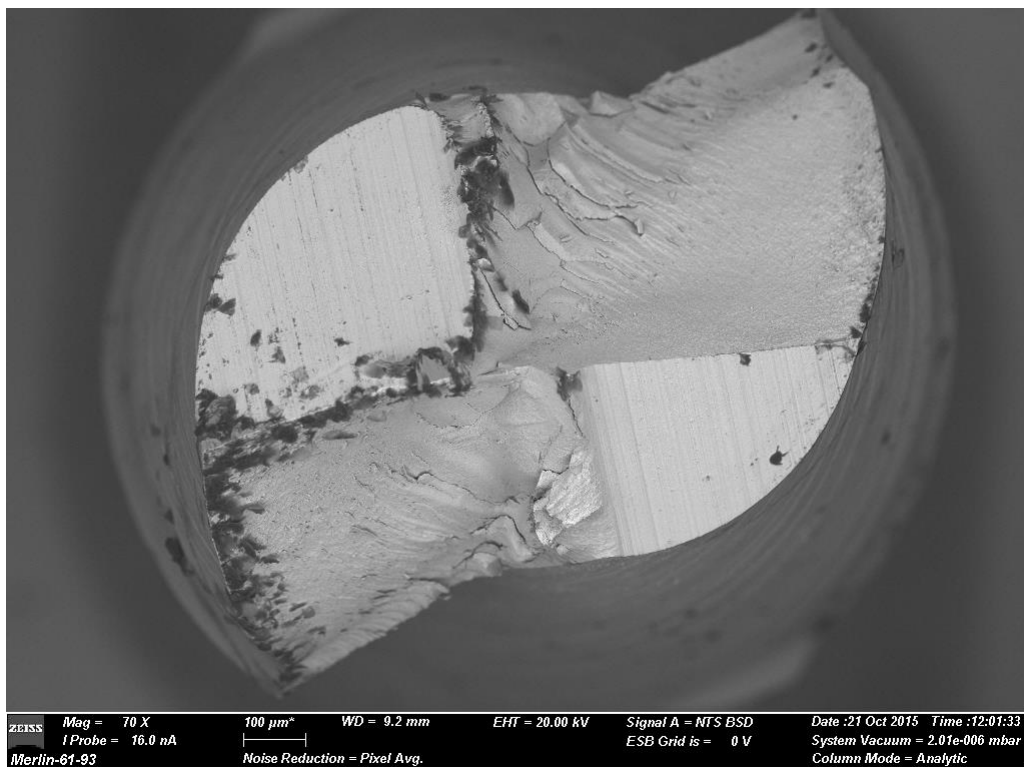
Experimental run 7: Tungsten carbide tool after machining with parameters $v_c=75.4$ [m/min], $v_f=576$ [mm/min] and $a_p=125$ [μm]
